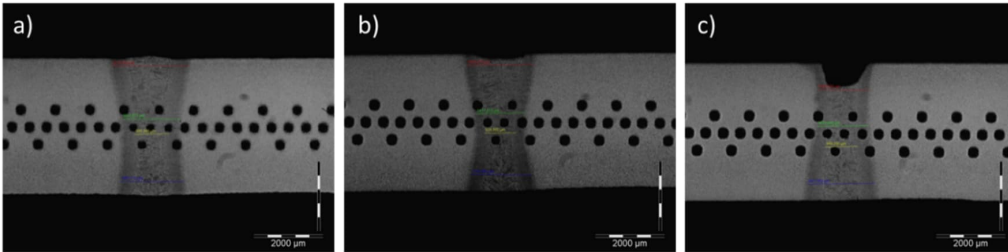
Cross-sections of laser welded 4 mm structural steel. a) 2.6 m/min 4kW, b) 3.9 m/min 6 kW and c) 5.3 m/min 8 kW.
